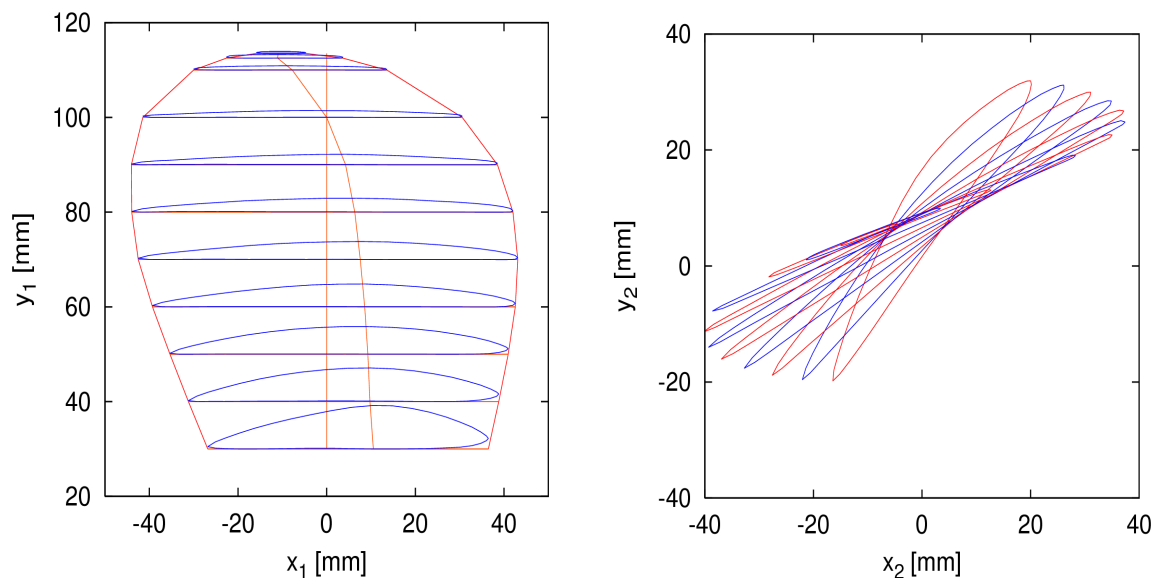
INSEAN E779A* model propeller drawings. Left: expanded outline; right: developed sectional profiles at correct pitch and rake. Dimensions in millimeters.
